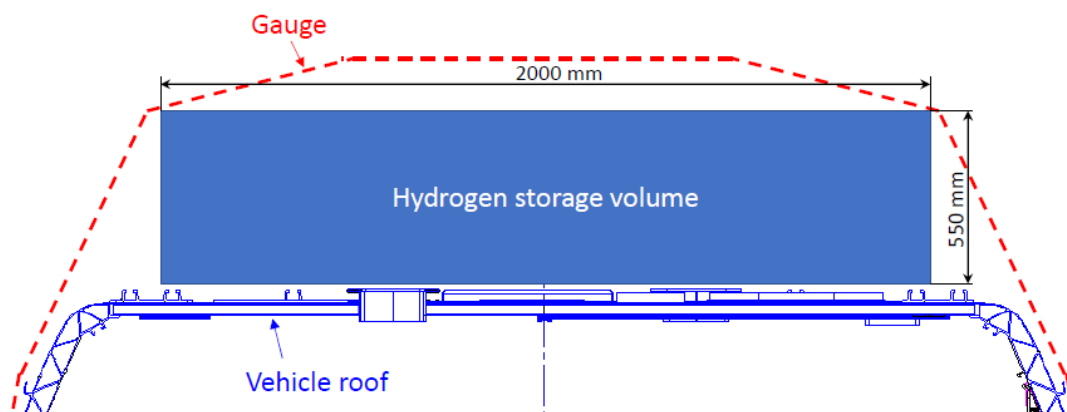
Space available for installation of H₂ storage system on the roof. Source: CAF
